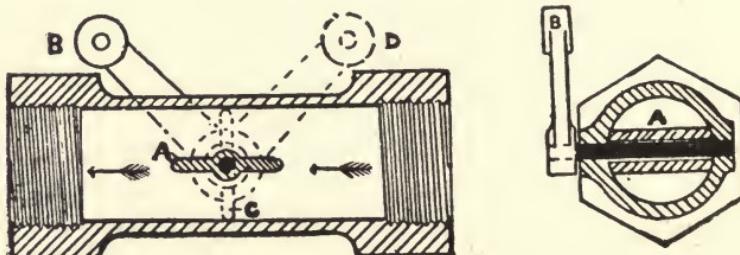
BUTTERFLY THROTTLE VALVE.
